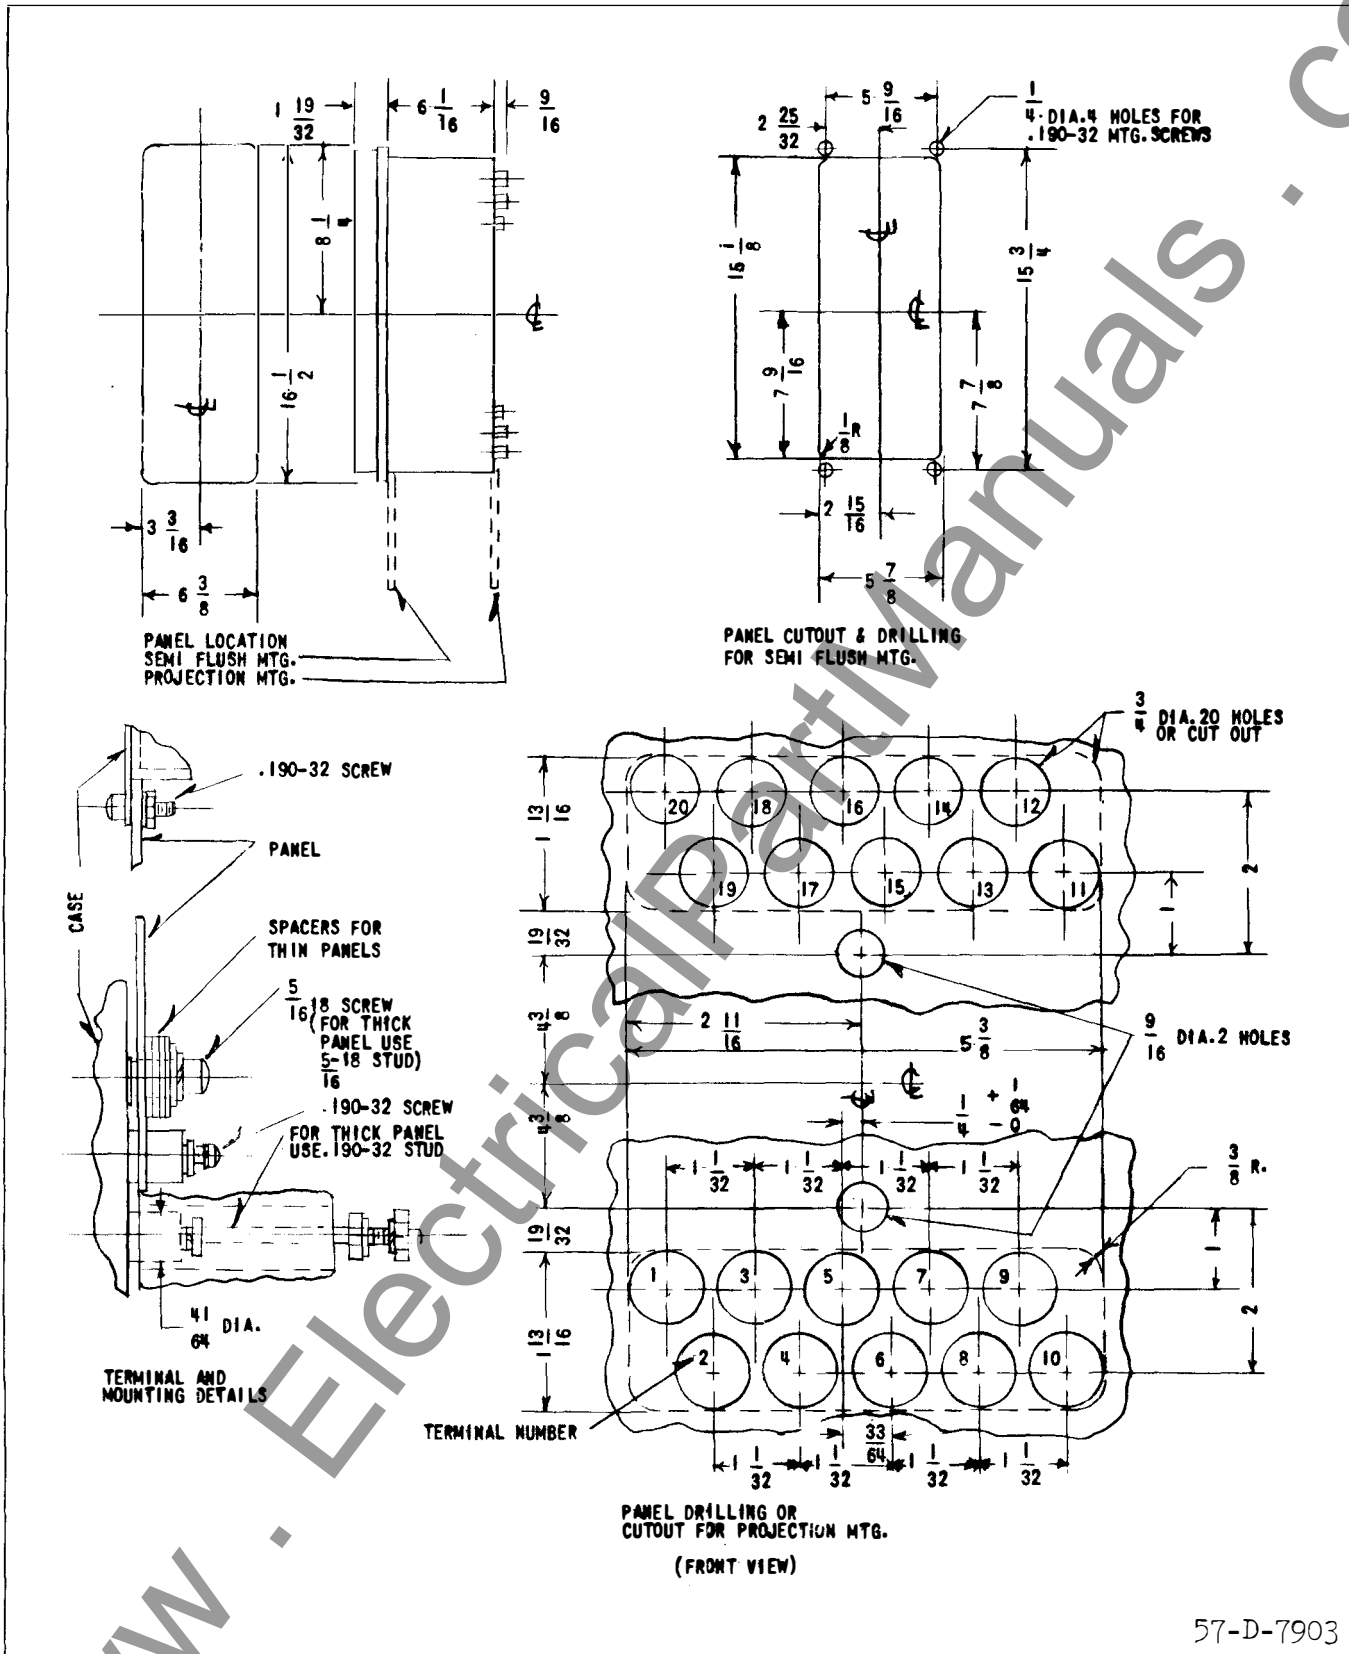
Outline and Drilling Plan for the Type FT32 Case
